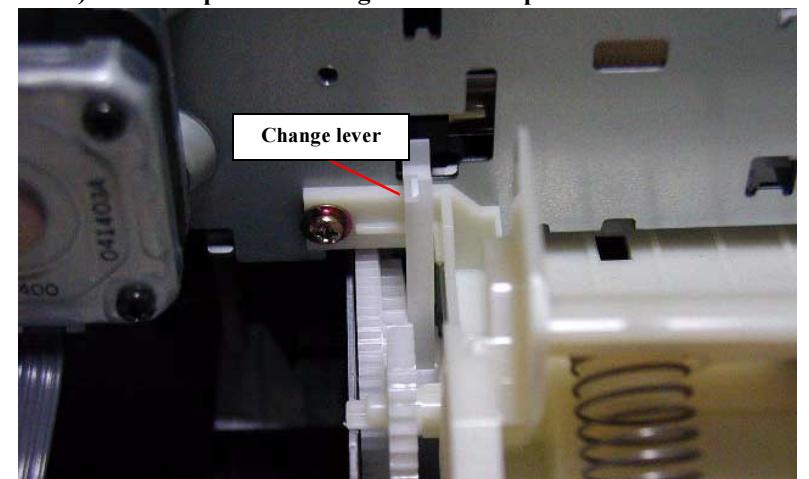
LD Roller shaft holder assembling procedure (1)
